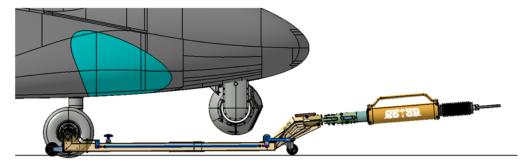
Tow Bar Assy: coupling shafts alignment with landing gear towing eyes
